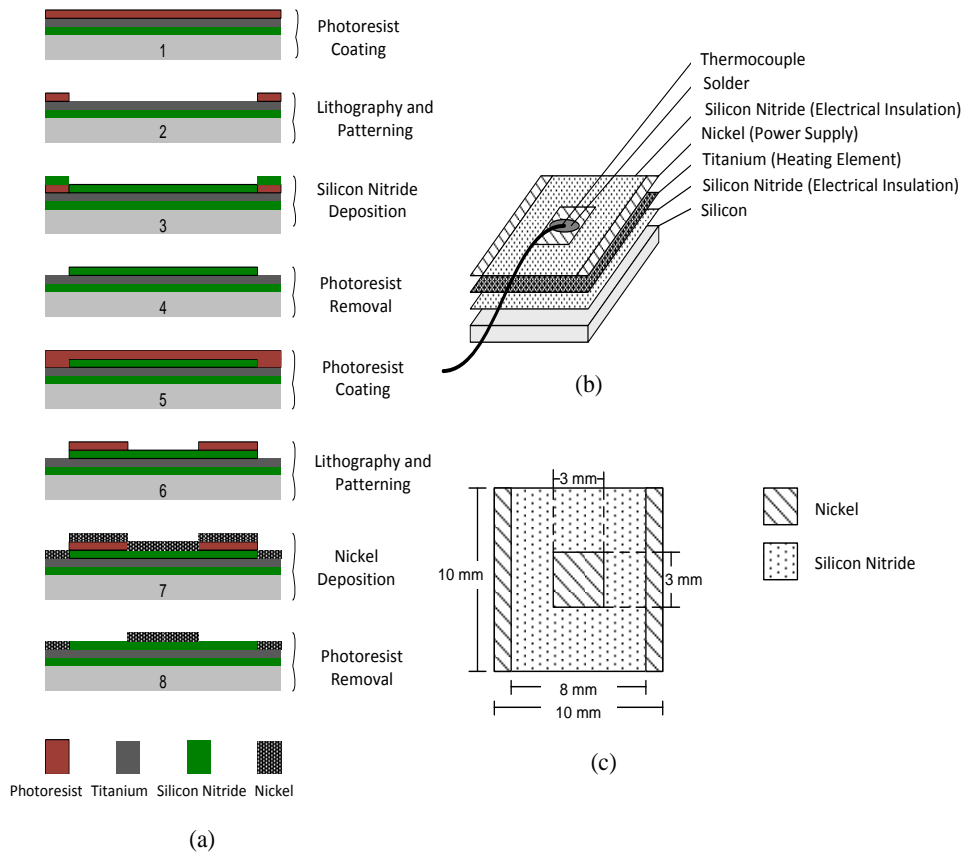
Thin Film Heater, (a) Fabrication Process, (b) Exploded View and (c) Side View
